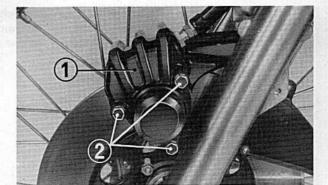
(1) Caliper cover (2) 6 mm bolt
